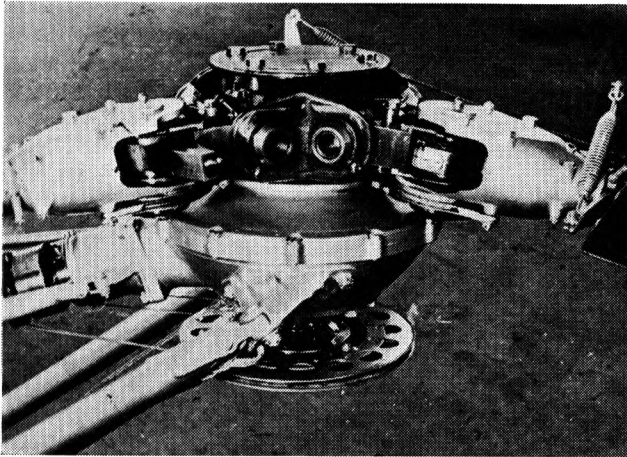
ROTOR HUB WITH BLADE-PITCH CONTROLS
